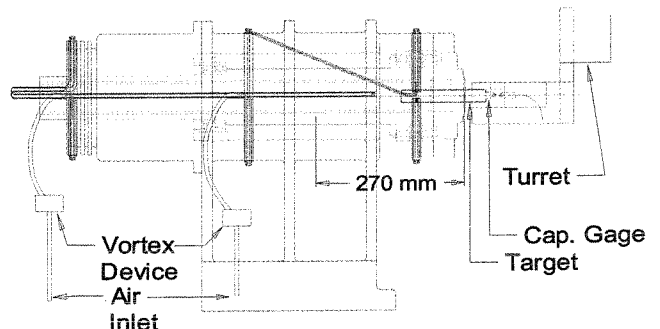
Experimental setup to measure axial spindle drift of turning center spindle.
